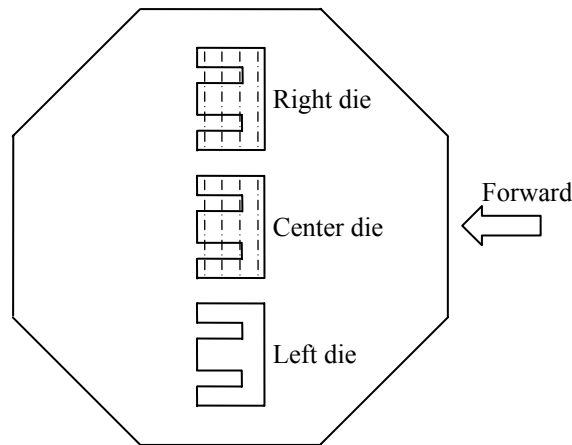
Locations of the pressure sensor strip for E-shaped dies
